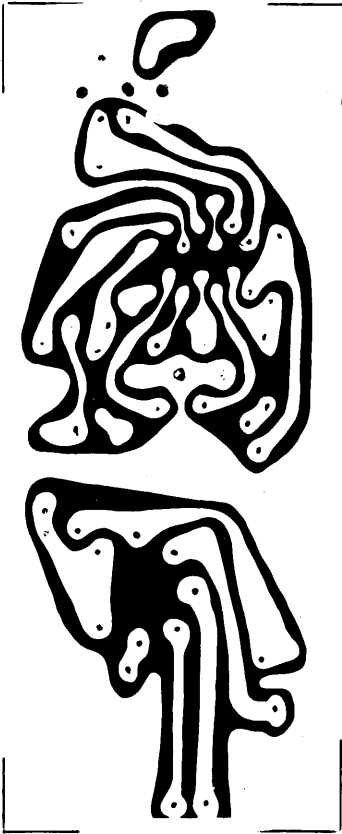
Recommended layout of printed-circuit board for complete TV-receiver sound strip utilizing RCA-CA3041 (Top View).
